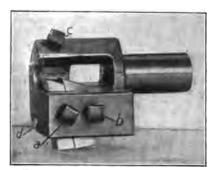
Standard Box-tool made by the Brown & Sharpe Mig. Co.
